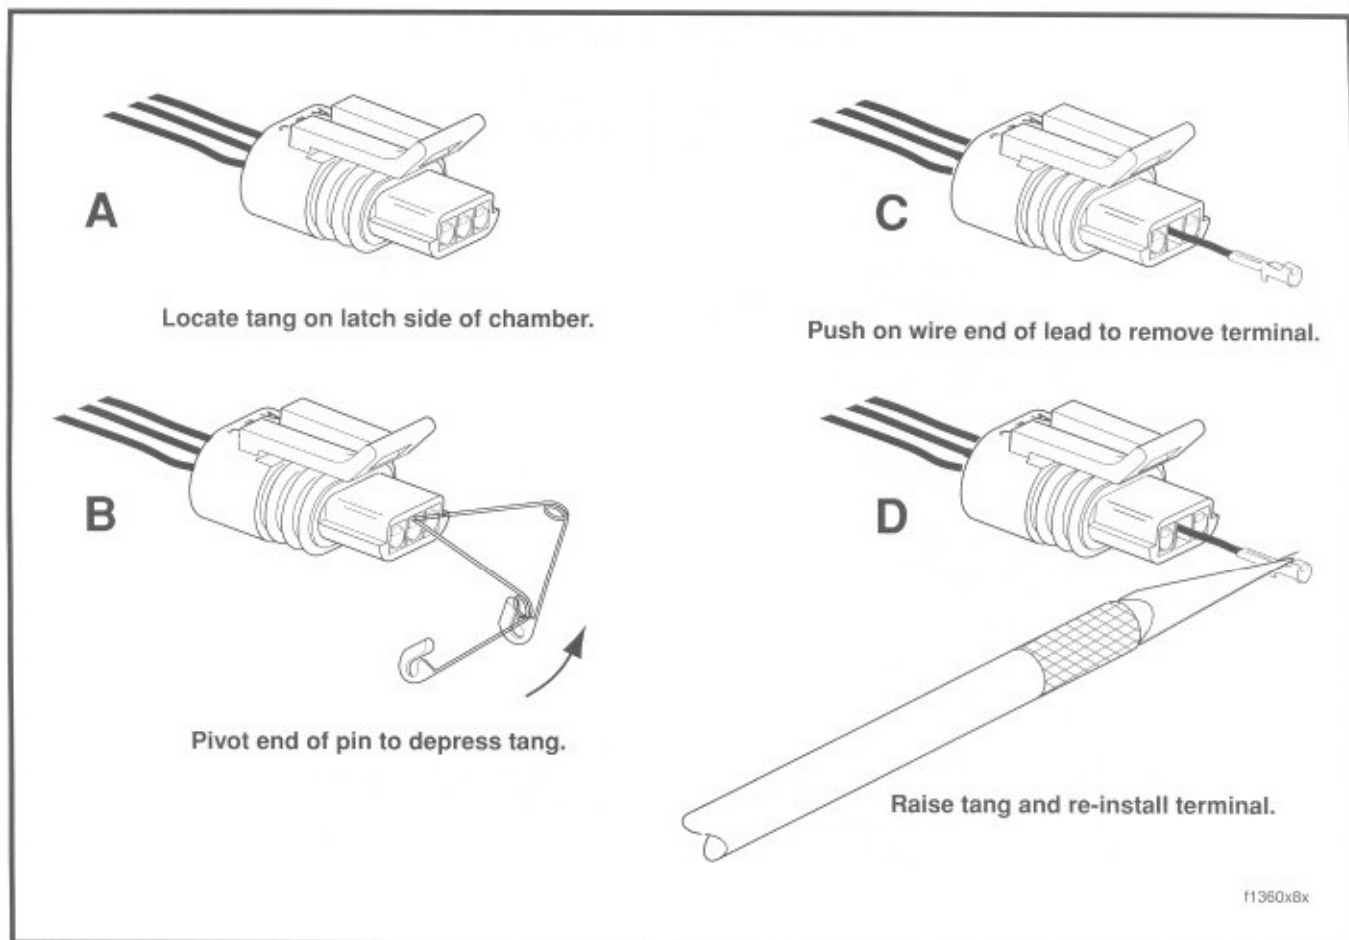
Depress Tang and Extract Terminal From Mating End of Connector
